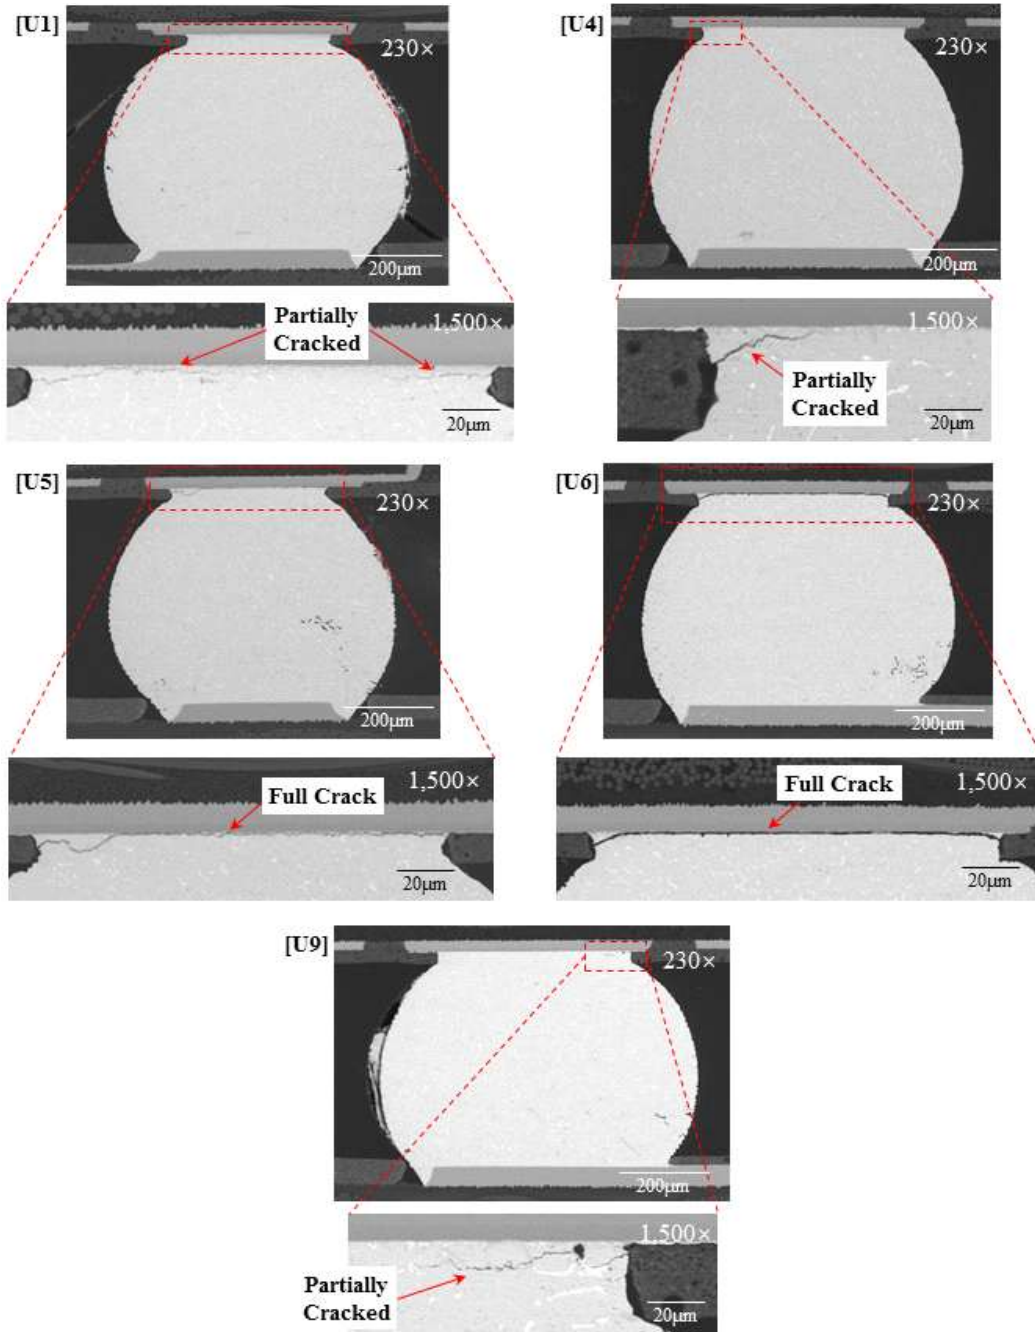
SEM Images of BGA Solder Balls After Vibration Test of 2nd PCB Specimen
